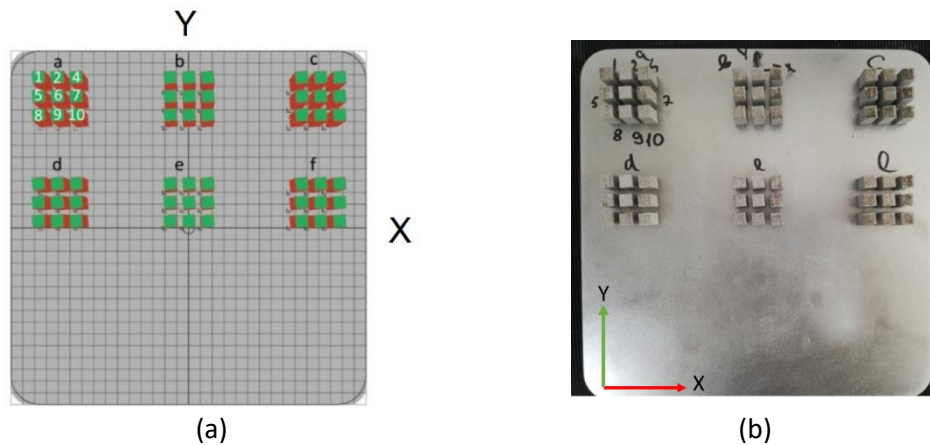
Specimens placed on building plate: a) image from machine software; b) manufactured specimens on the building plate
